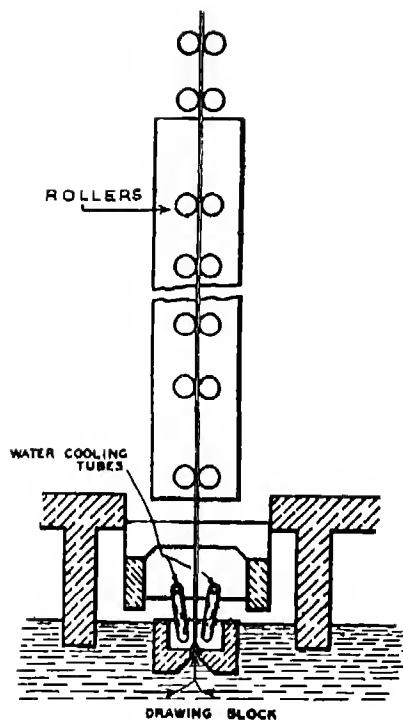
Fourcoul process for drawing continuous sheets from molten glass in a tank furnace
